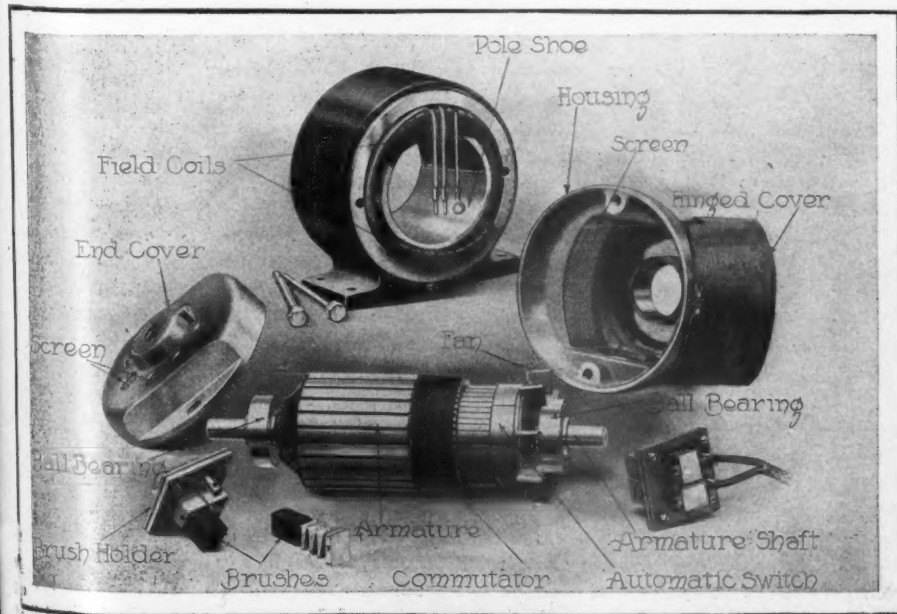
PARTS OF HOLTZER-CABOT LIGHTING DYNAMO
